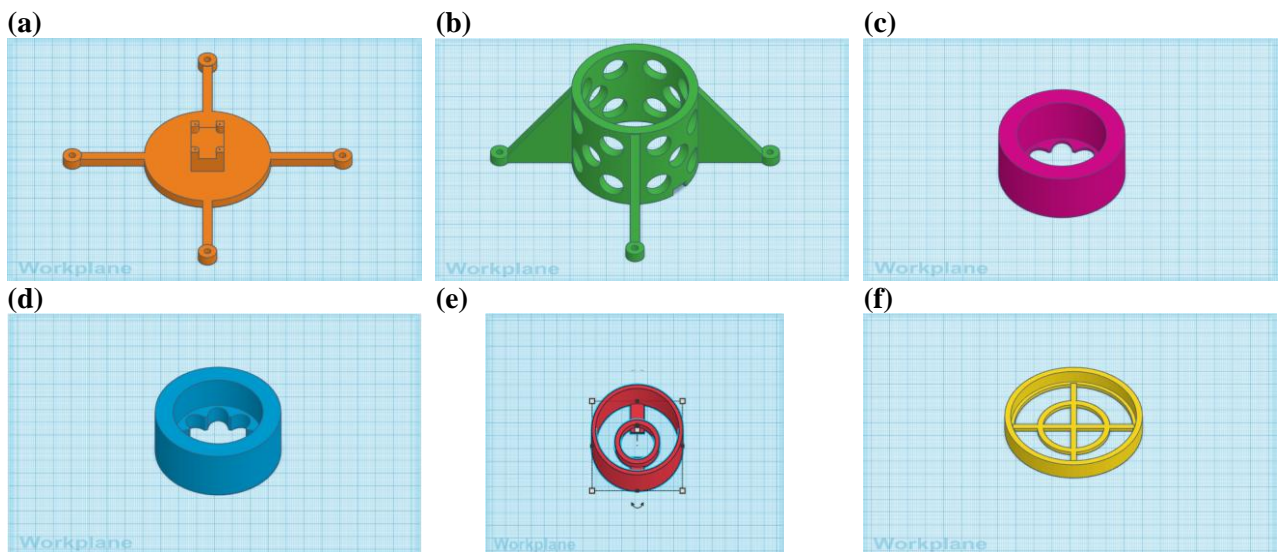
CAD images of (a) base for sensor.stl, (b) air inlet unit.stl, (c) lower adaptor for tube.stl, (d) upper adaptor for tube.stl, (e) holder for fan.stl and (f) protector for fan.stl.
